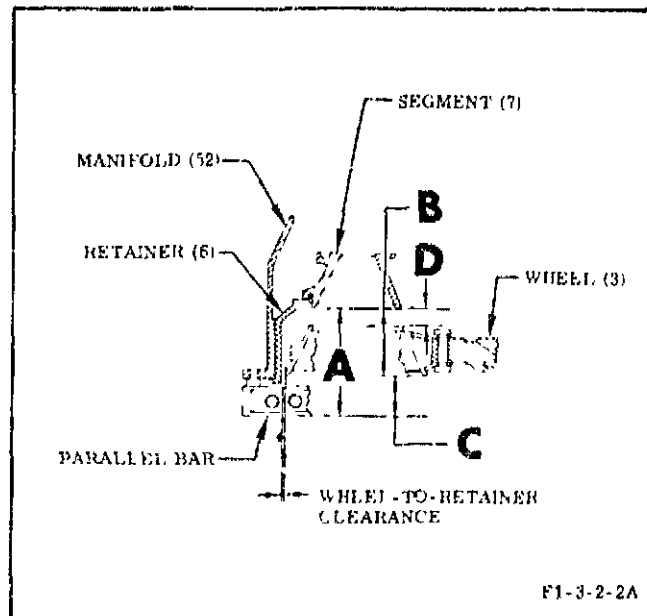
A-8. Determining Second-Stage Wheel-to-Segment Clearance
